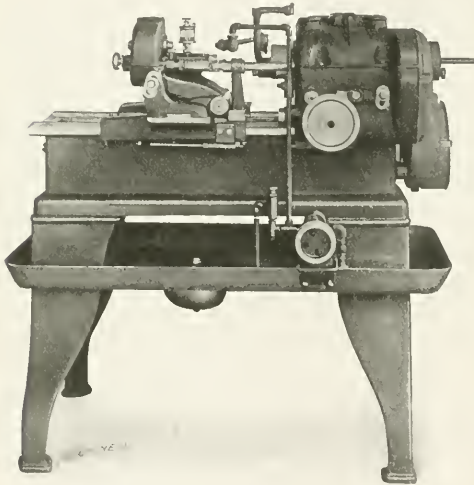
External Thread Milling Machine for threading Rifle Barrels
